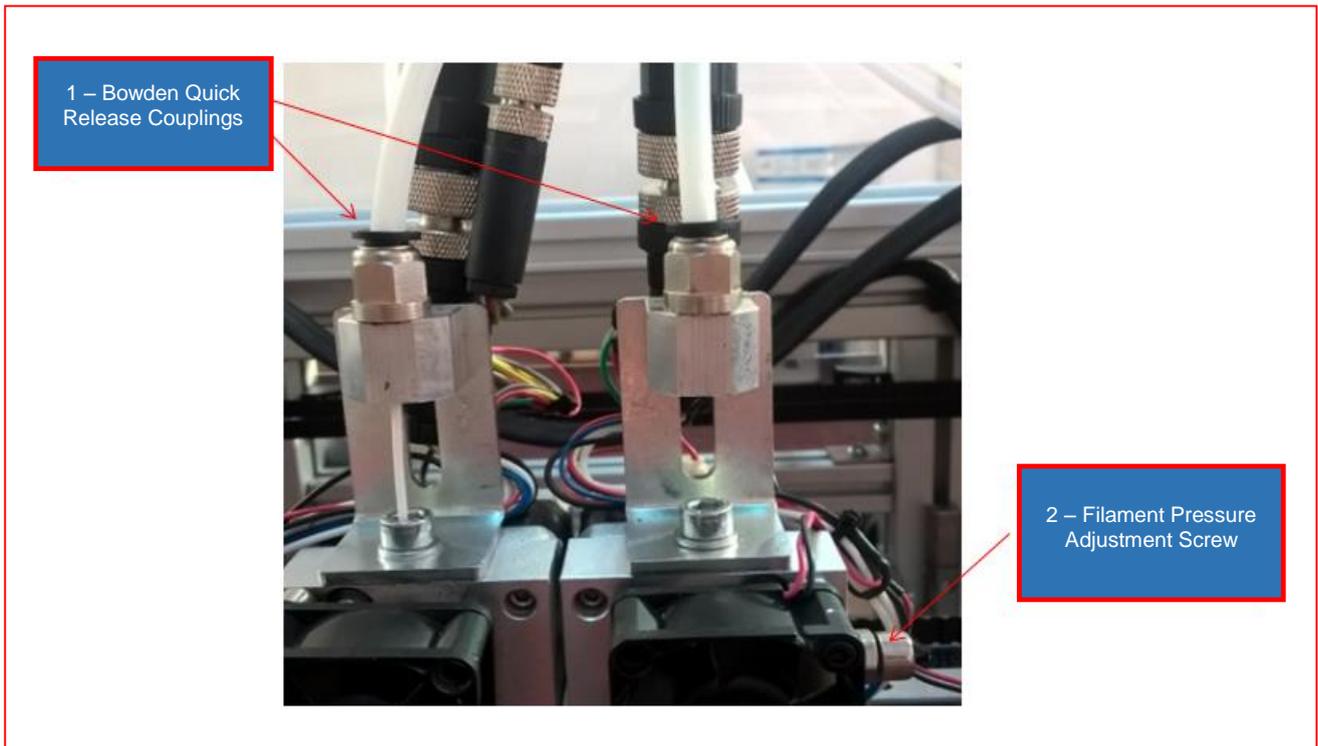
Feeder assembly terminals and pressure adjustment screw
